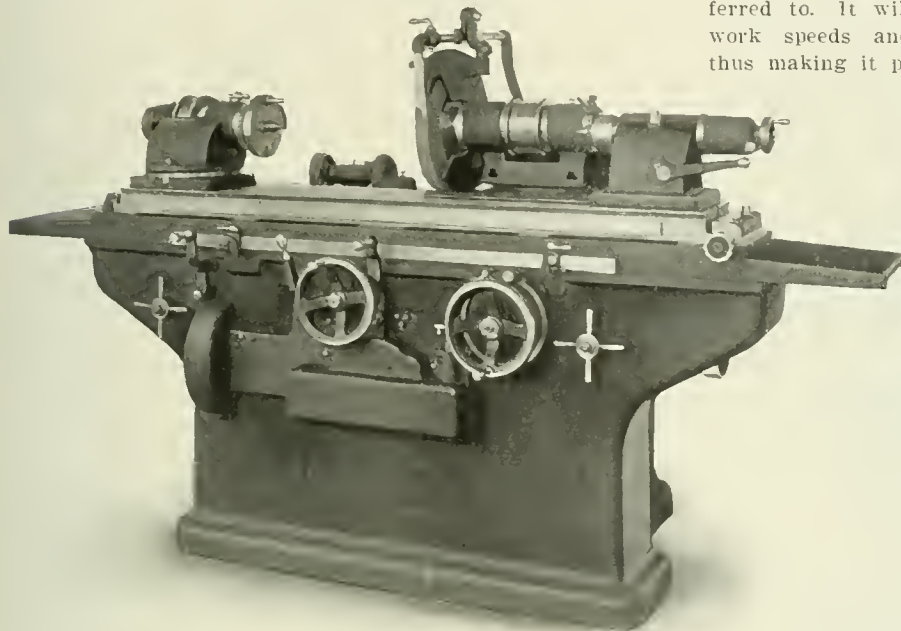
Universal Grinder built by the Cincinnati Grinder Co.
